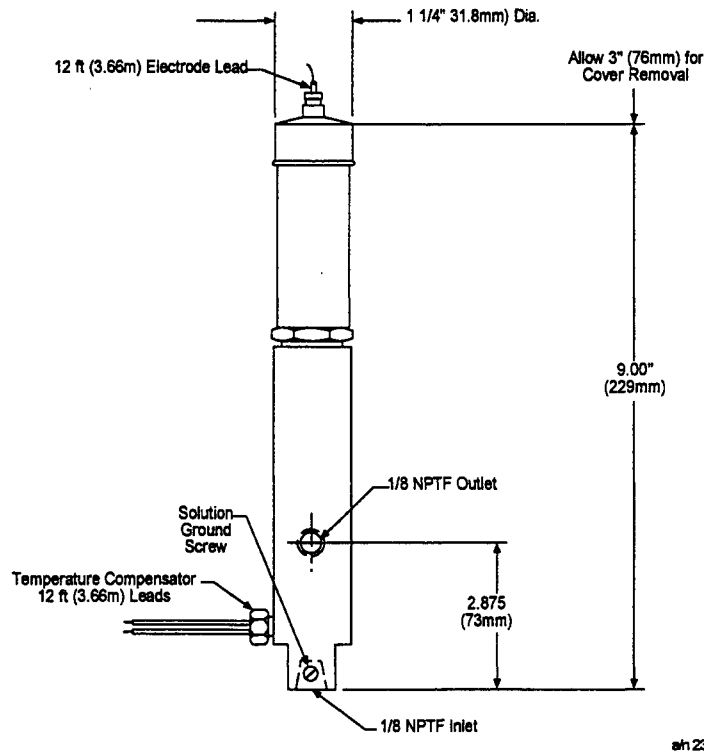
Mounting Drawing for 7758 High Purity Water Electrode
